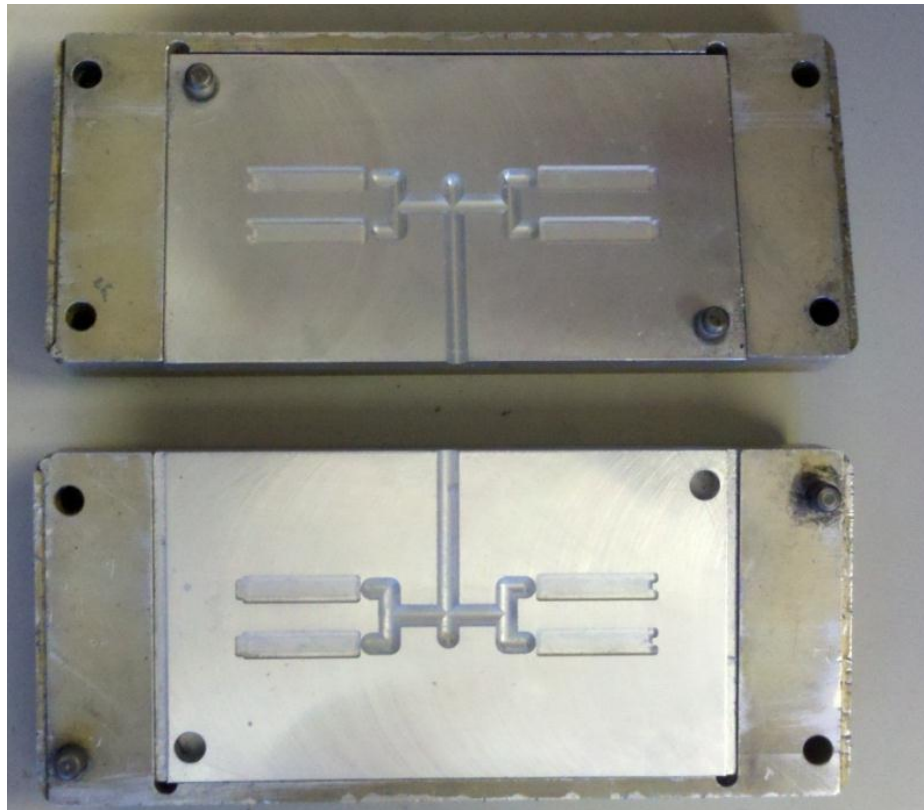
Digital camera image of CNC created injection molds (bend test) placed in holding mold holding shell.
